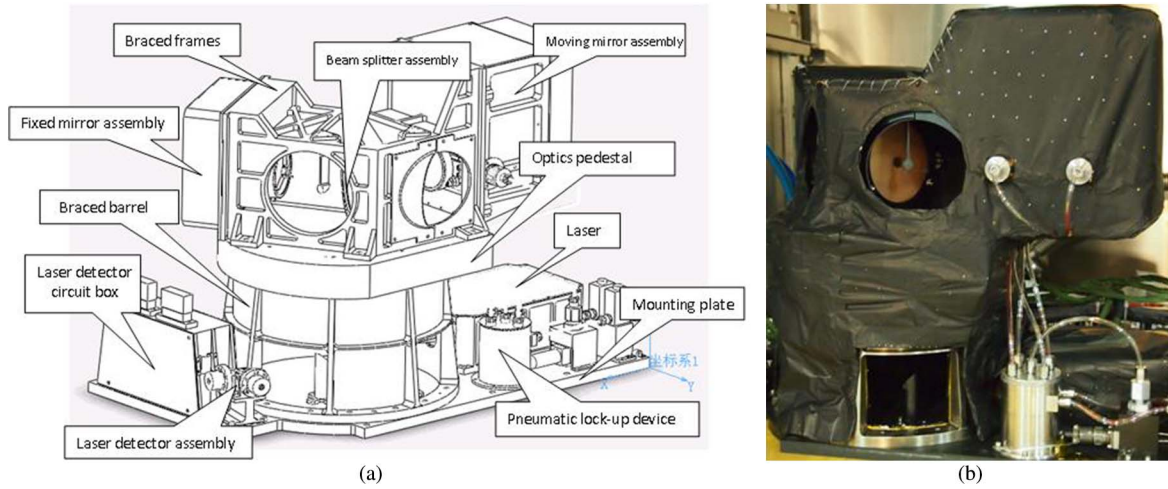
(a) Mechanical assembly drawing and (b) interferometer product.
